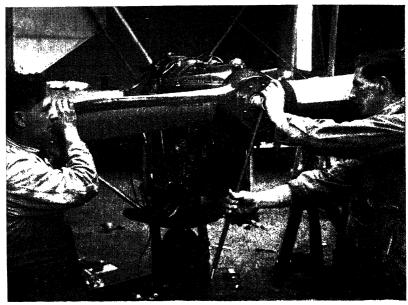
Removing crankshaft nut, using airscrew to prevent shaft moving.
